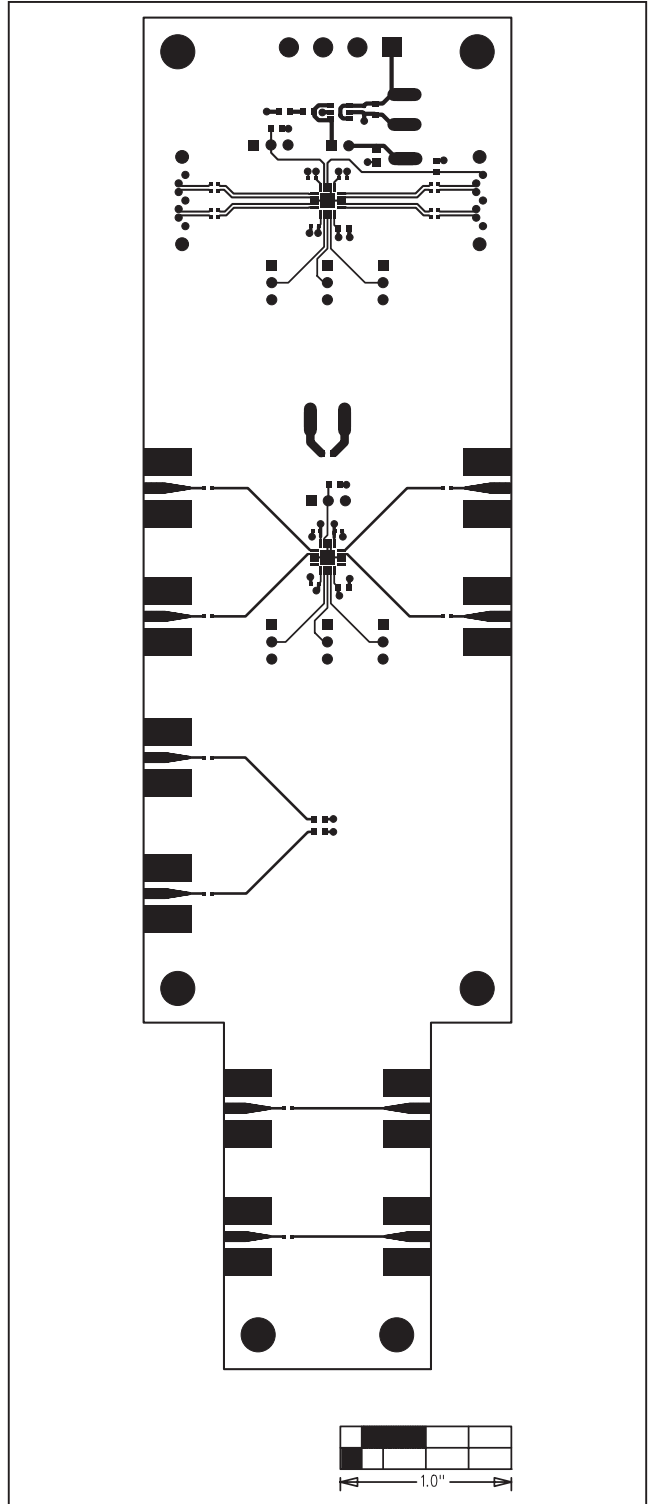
MAX4951B EV Kit PCB Layout—Component Side
